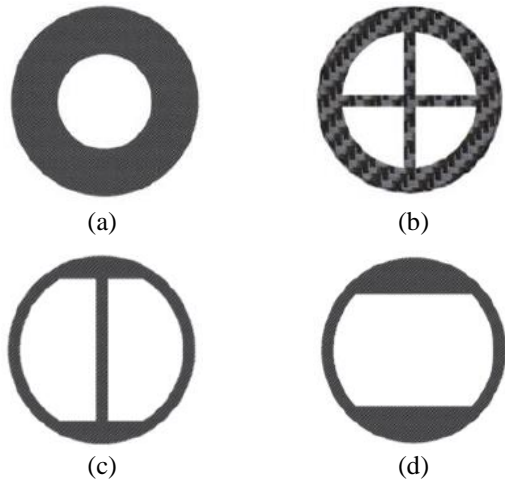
Arm designs considered: (a) original, (b) cross supports, (c) I-beam support and (d) wall reinforcement.
